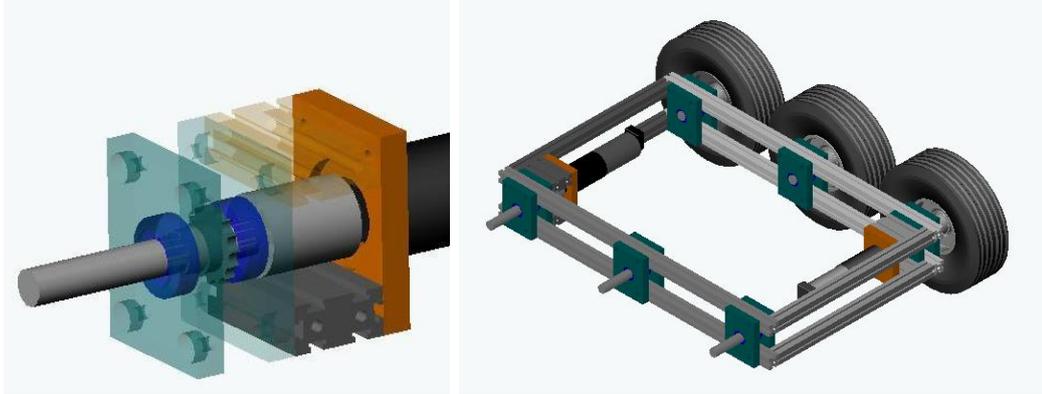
Drive unit with attached motor block (left) and full drive assembly (right)
